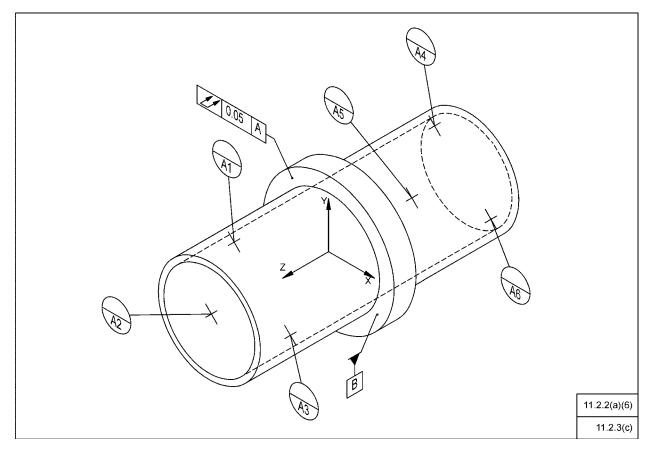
Equalizing Target Points Establish a Datum Axis on an Internal Cylindrical Surface
